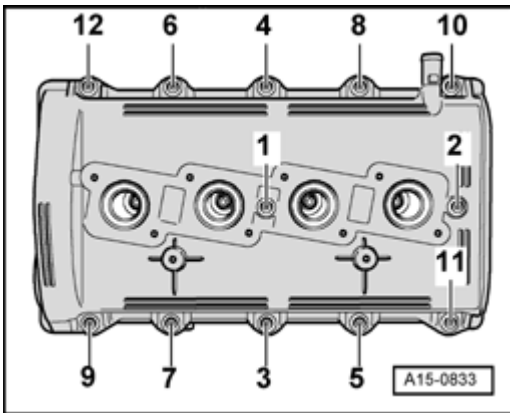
Cylinder Head Cove Bolt Loosening/Tightening Sequence
